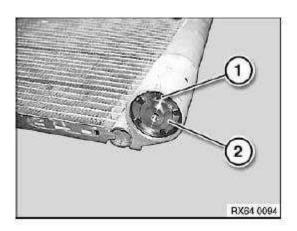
Identifying Plug Connection And Bolts Courtesy of BMW OF NORTH AMERICA, INC.
